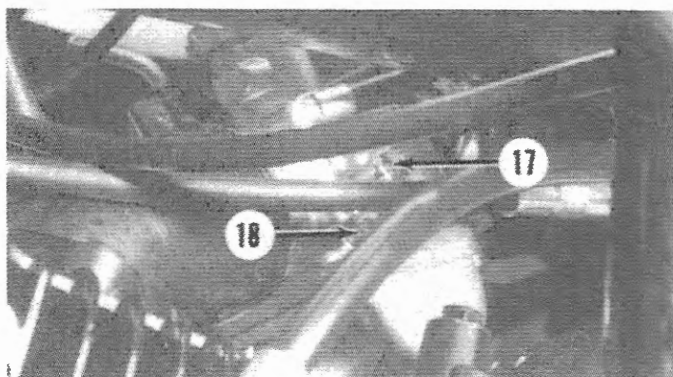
View of installed carburetor showing location of idle speed screw (17) and idle mixture screw (18).
